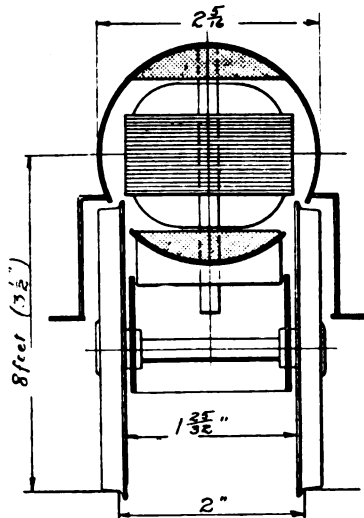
THE "UNIVERSAL" BOILER MOTOR APPLIED TO A SINGLE-WHEELED EXPRESS LOCOMOTIVE.
